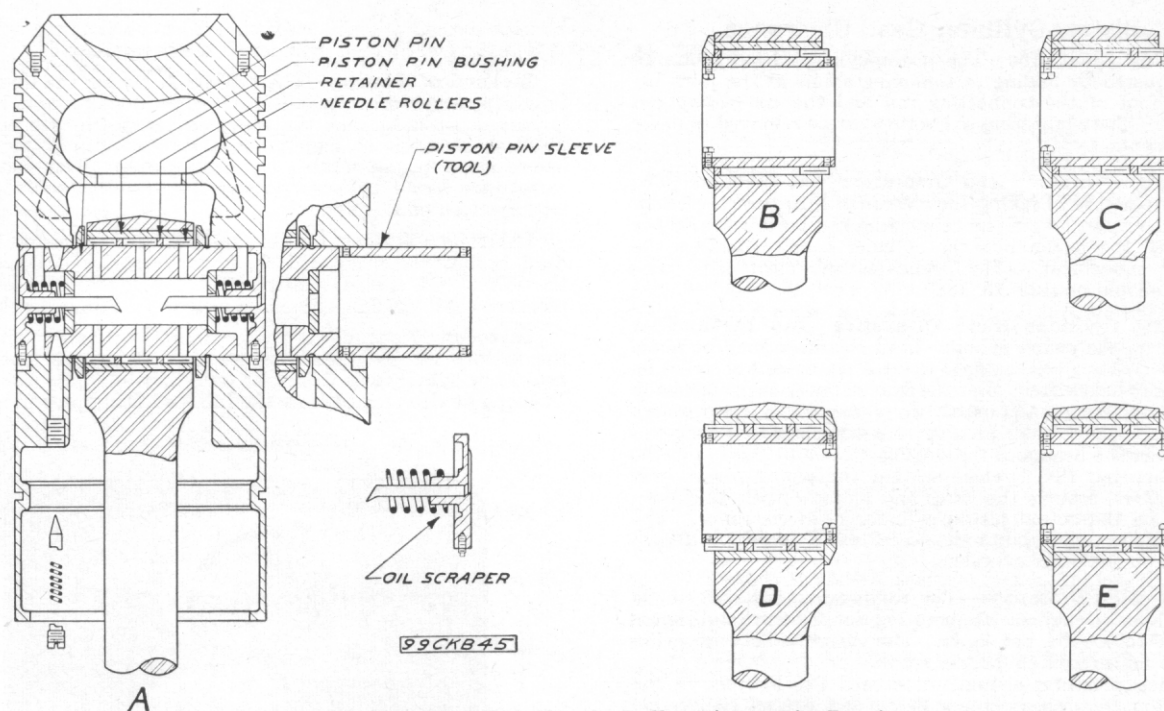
Disassembling Needle Roller Piston Pin Bearing
